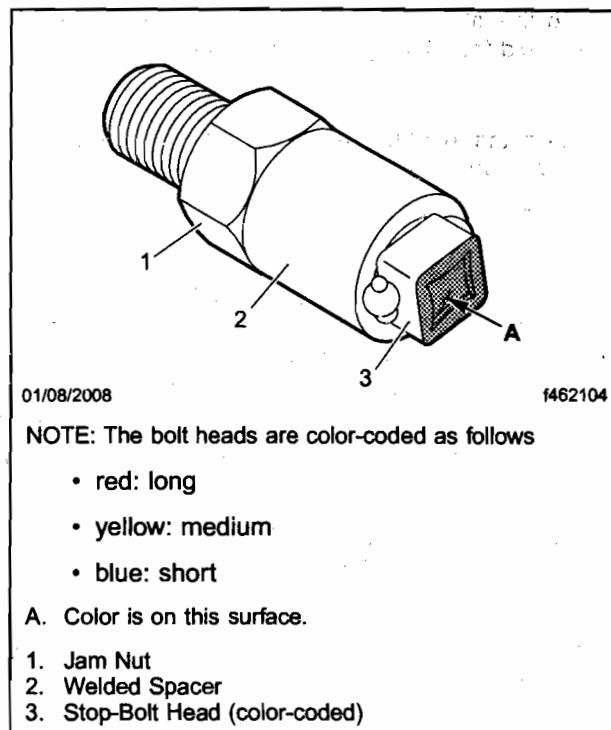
, New Axle-Stop Bolt (short bolt shown)
